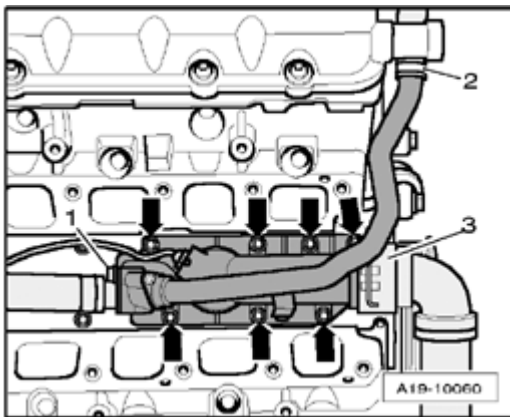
Coolant Hoses, Thermostat Housing Bolts & Pipe Connection Bolts
